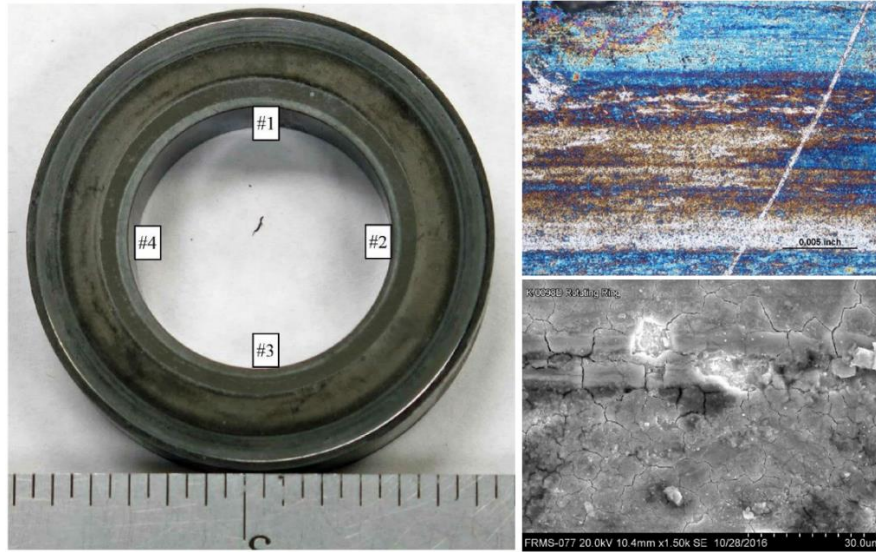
ACD Pump Mechanical Seal Rotating Face. The scale for these images is 1/16-inch (left), 0.005-inch (top right), and 30-micrometers (bottom right).
